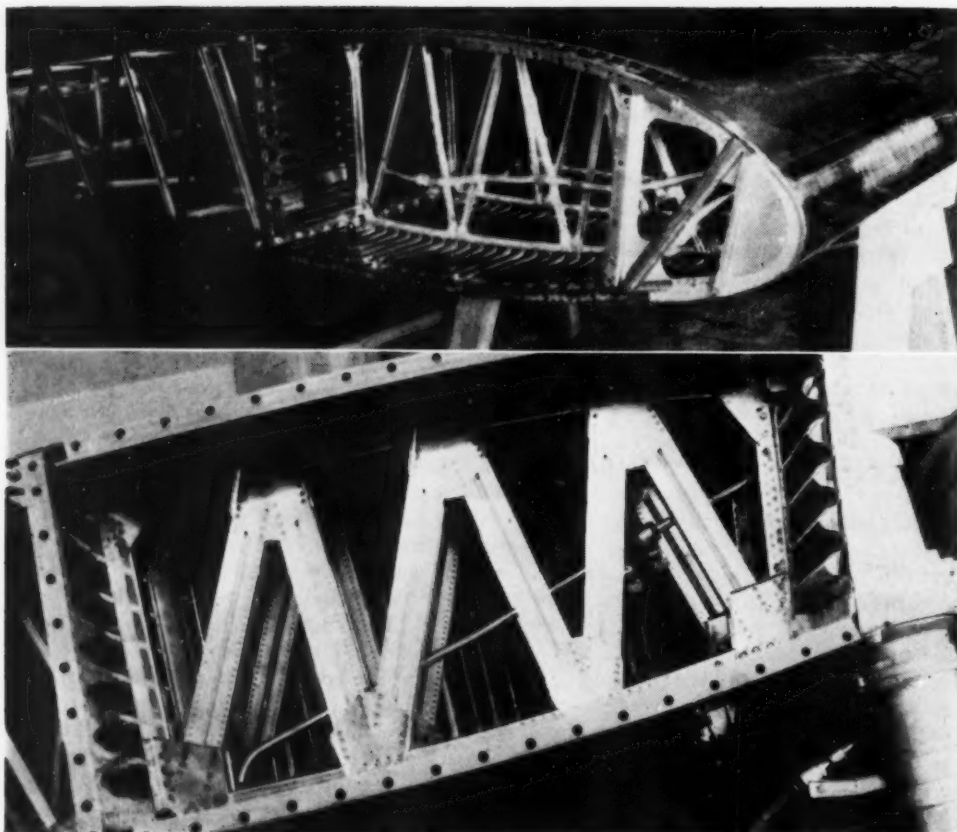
SECTIONS OF STAINLESS-STEEL AIRPLANE WING
